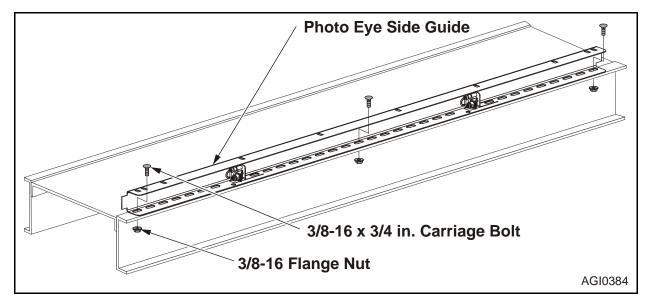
68 Direct-Mounting the Photo-Eye Side Guides
